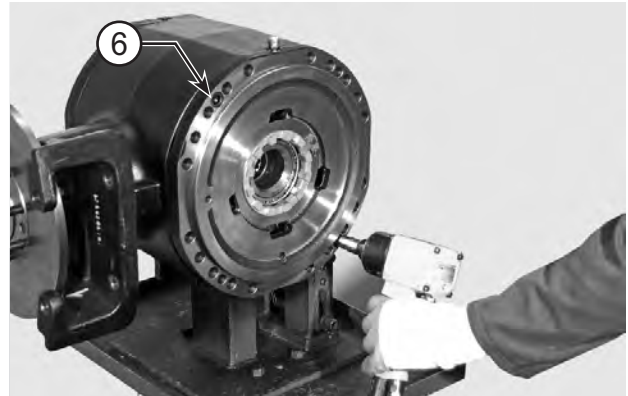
Tighten two safety M16 studs in the main body. Loosen and remove the check screws (6) of intermediate cover (7) on ring gear side.
